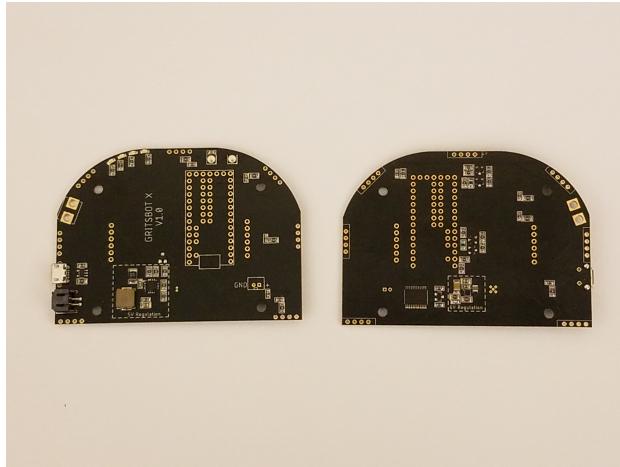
The main circuit board of the GRITSBot X after fabrication and partial assembly. This is the assumed starting point for PCB assembly.
